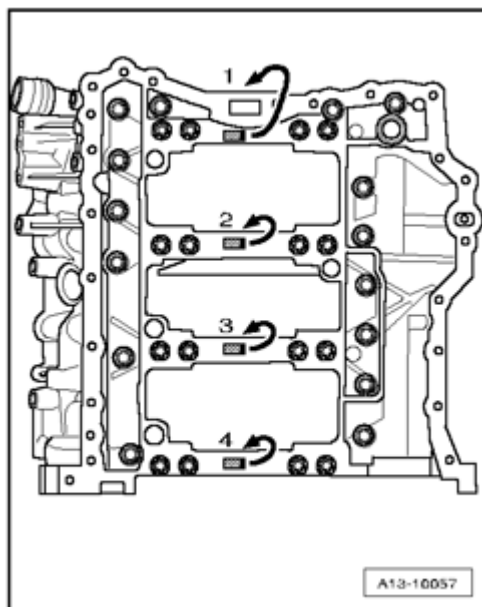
Allocation Of Crankshaft Bearing Shells For Cylinder Block
